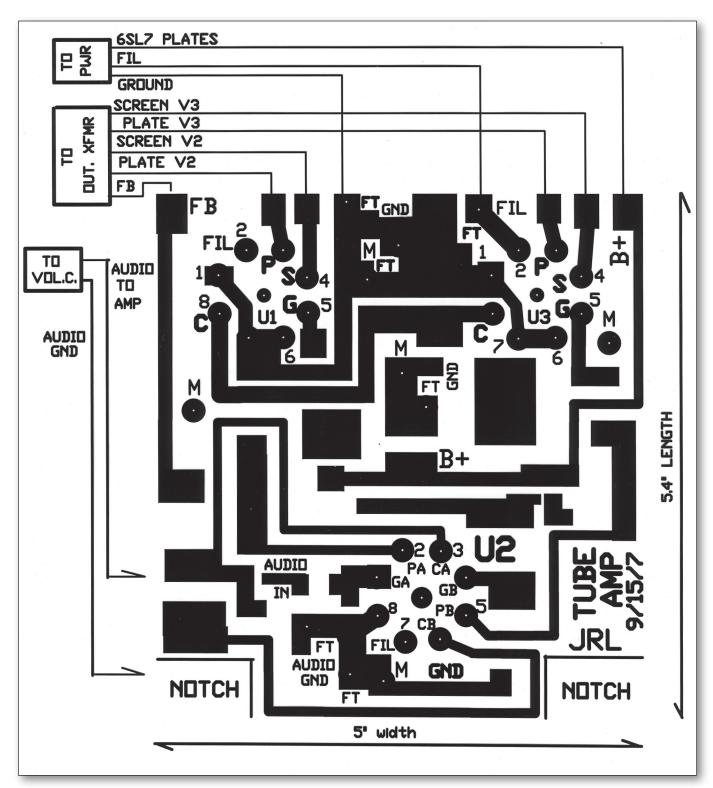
FIGURE B: Bottom layer, with parts surface-mounted on bottom, except tube sockets, which are on top.
